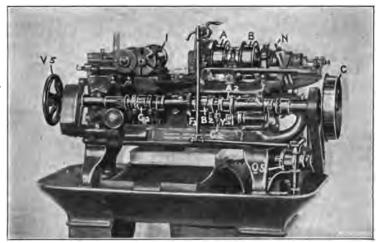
Rear View of No. 00 Brown & Sharpe Automatic Screw Machine
